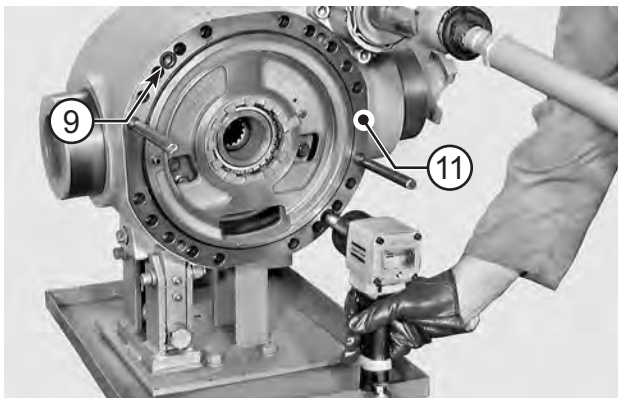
Tighten two safety studs (M16) in the main body. Loosen and pull out check screws (9) from intermediate cover (11) on gear ring side.
